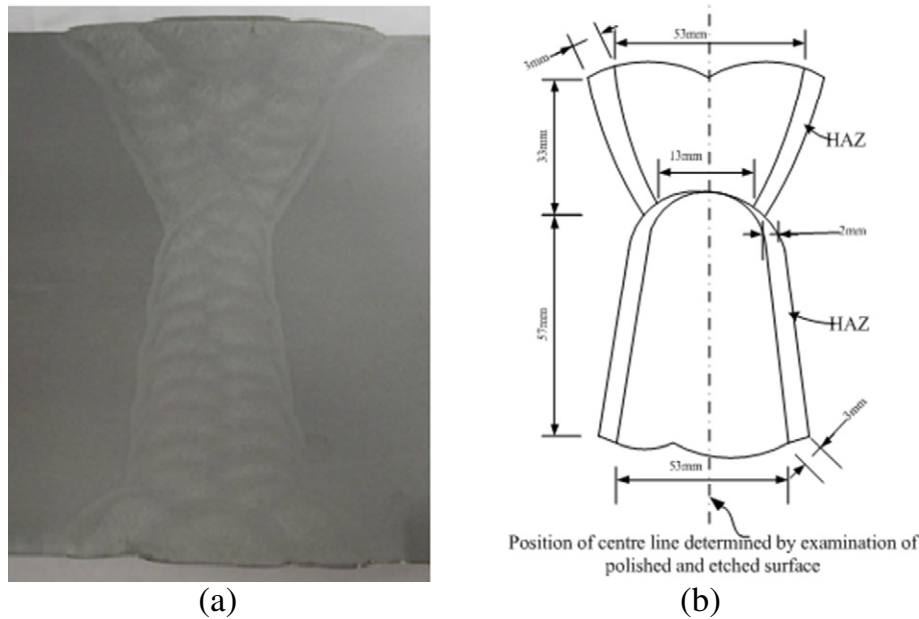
(a) An example of a ground, polished and etched surface of the weld section (b) measured dimensions of the weld and HAZ regions.
